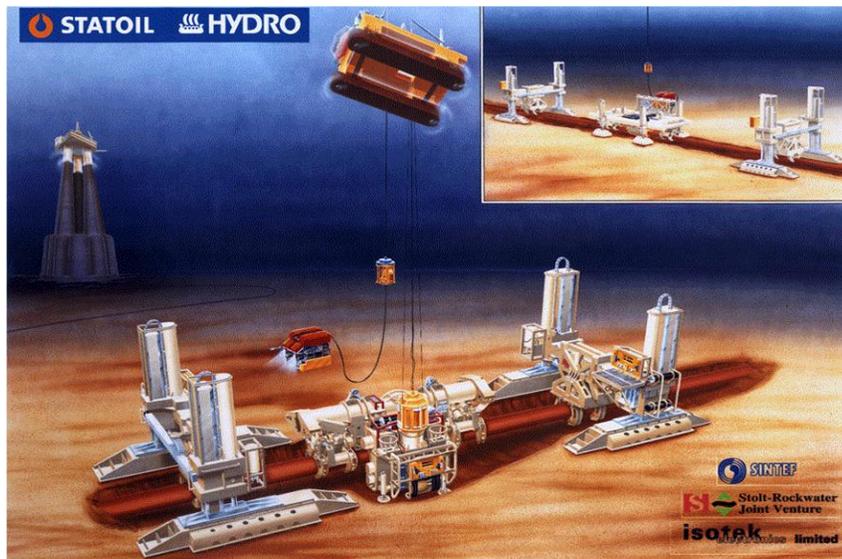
PRS welding habitat during installation for welding at the Langeled pipeline.
